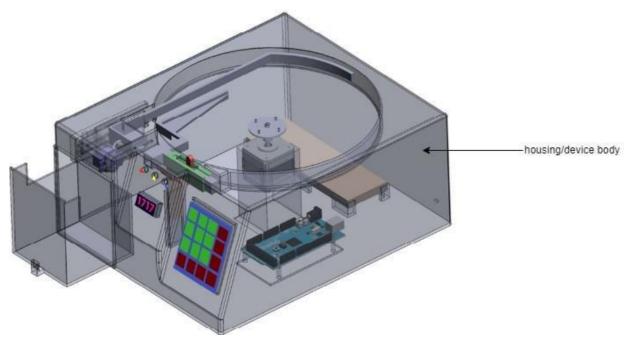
A 3D view of the design modelled in SOLIDWORKS 3D DESIGN TOOL
